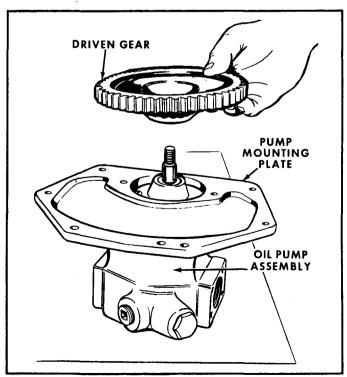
Removing the Driven Gear from the Oil Pump Assembly.
